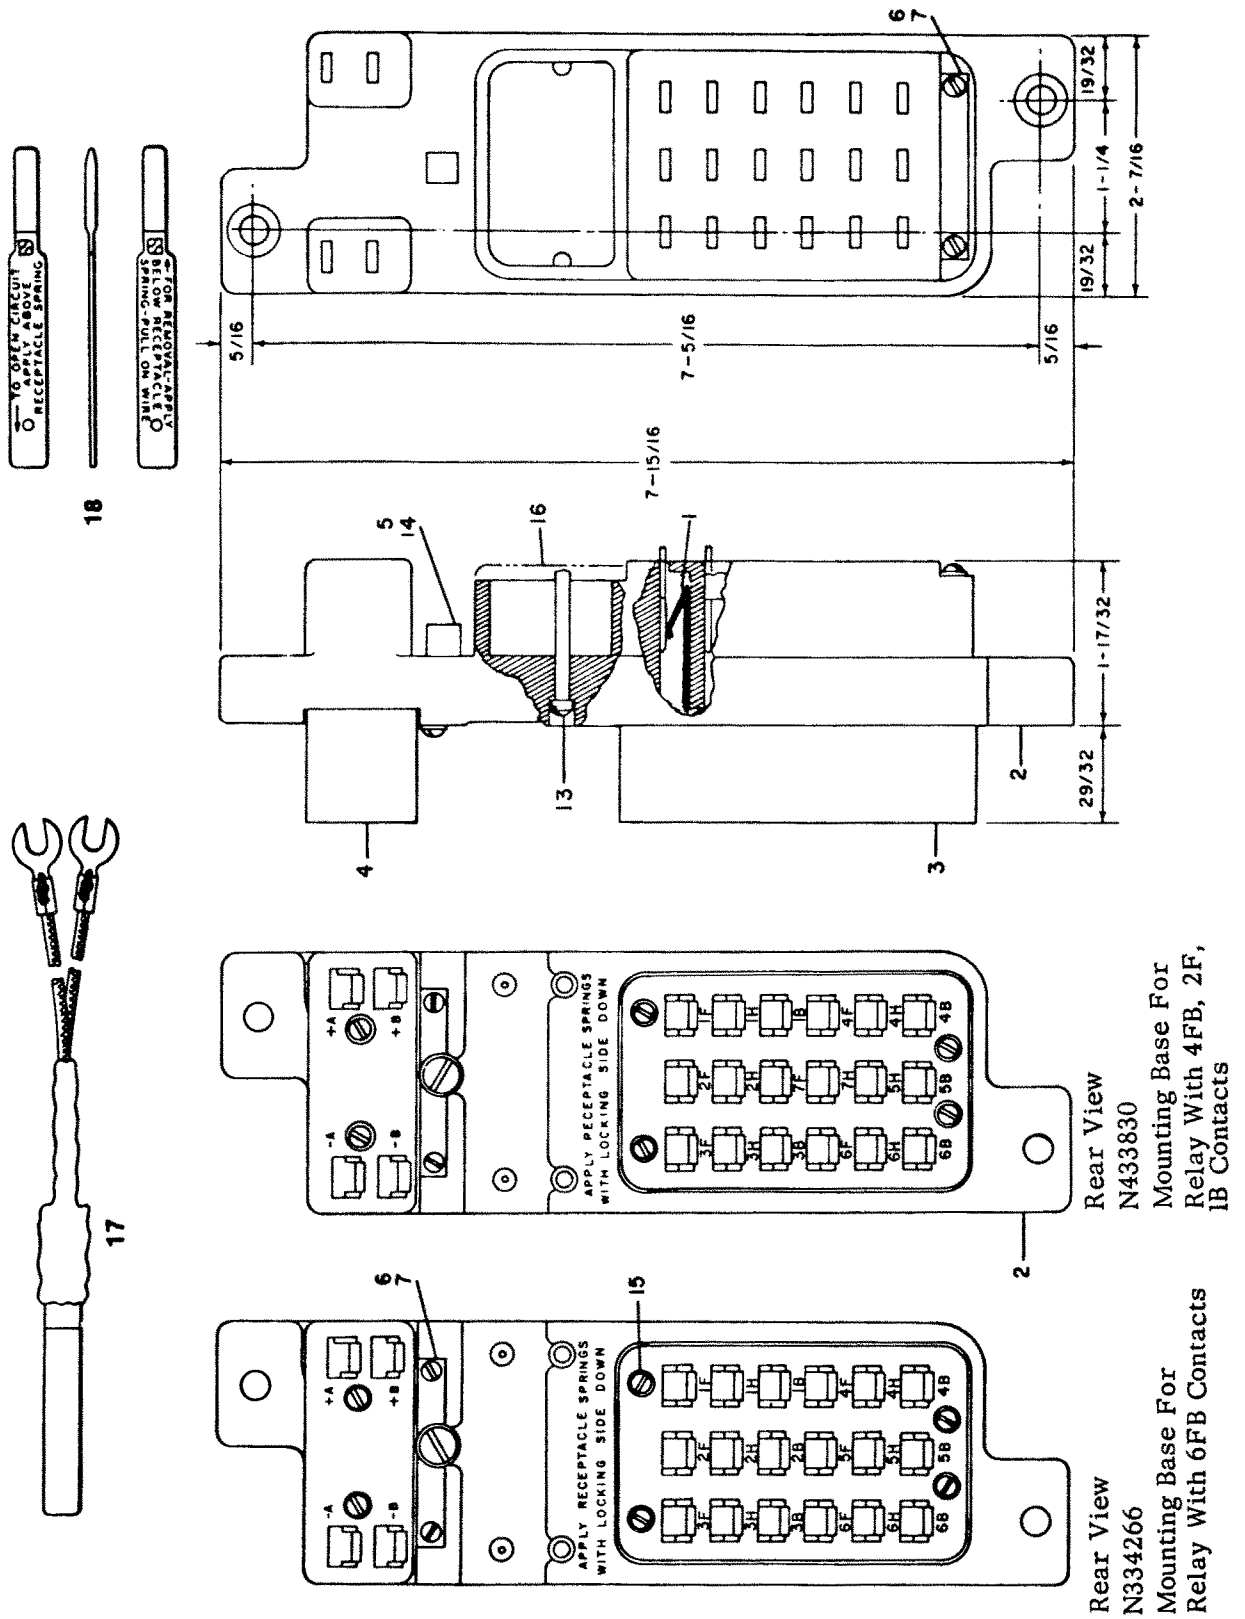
Old-Style Mounting Base for PN-150B Relays
